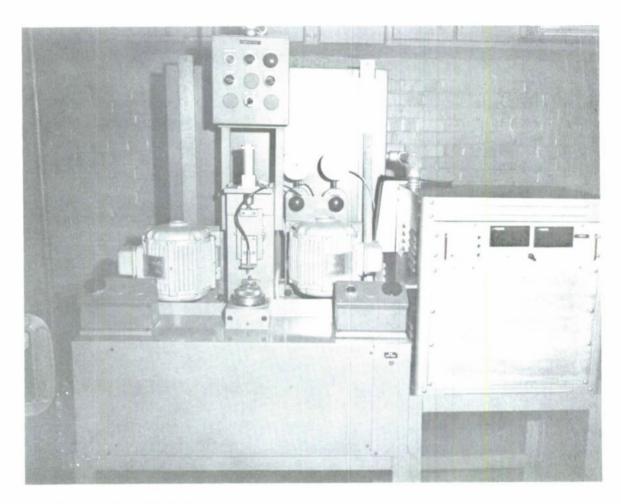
M550 Fuze Centerplate Assembly Sample Test Machine
